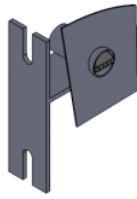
Cylindrical cutting blade system is round with 45° cutting angle.
